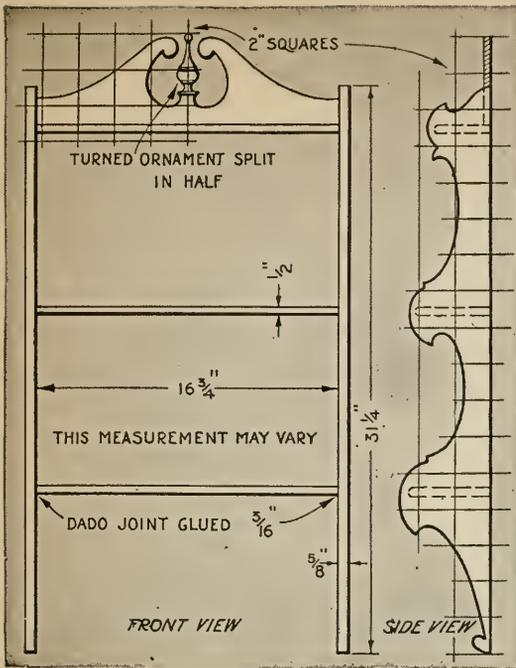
Assembly drawing of the shelves with the curved outlines, which are to be enlarged by laying them out in 2-in. squares.
